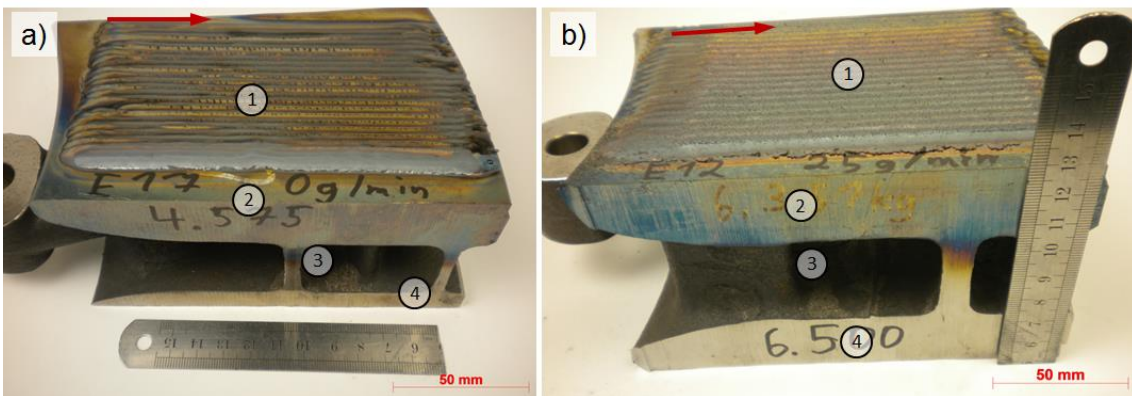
Clad layer on railway brake disc section (axel mounted); a) GTA cladding with PFR = 0g/min or 0 g/mm; GTA WC cladding with PFR = 25 g/min or 0.0833 g/mm deposition rate; 1: Cladding layer; 2: brake disc wear surface; 3: brake disc cooling vanes; 4: lower brake disc wear side; red arrow: welding direction
